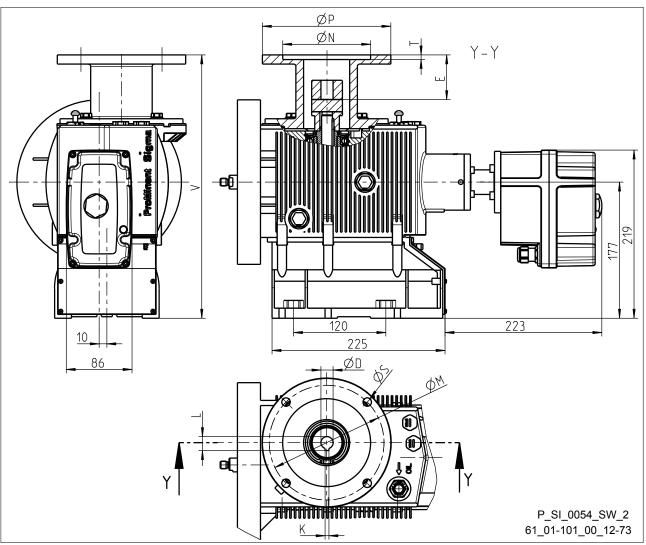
Dimensional drawing of Sigma/ 3, S3Ba with motor flange - dimensions in mm - Drawing is not strictly binding.
